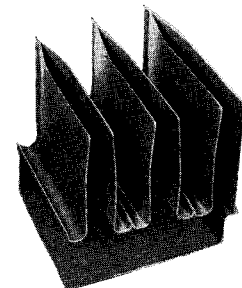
SECTION OF RADIATOR SHOWING FANNED OUT TUBES
